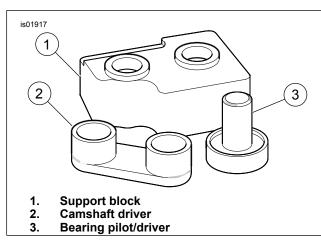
Camshaft and Camshaft Bearing Remover/Installer
